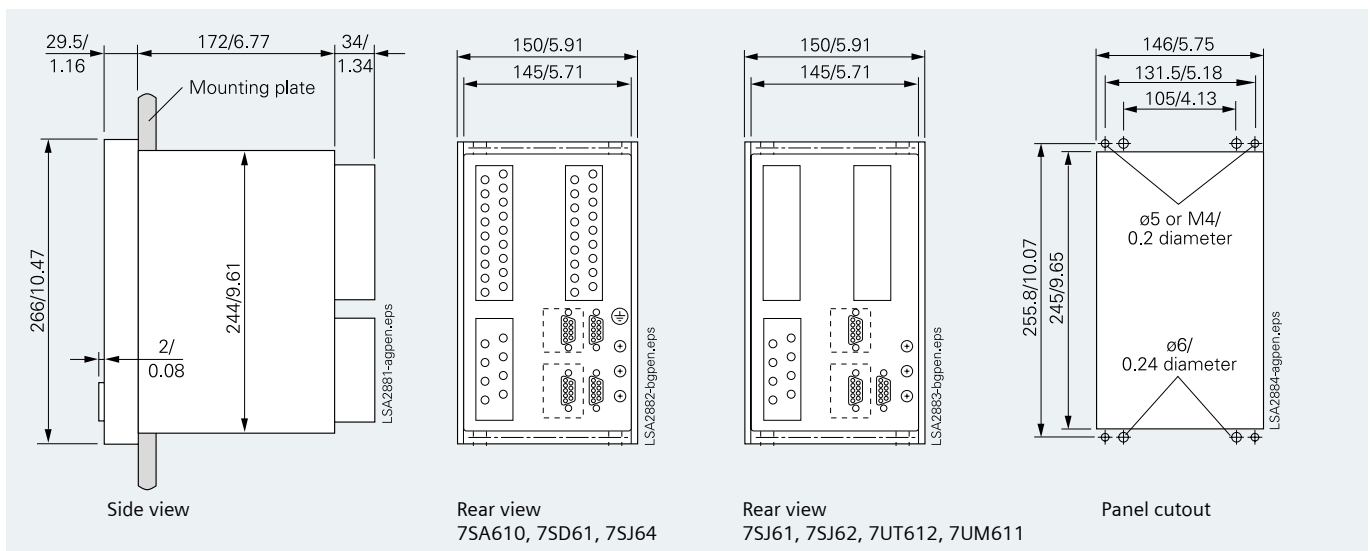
/18 Housing for panel flush mounting / cubicle mounting (1/2 x 19")
